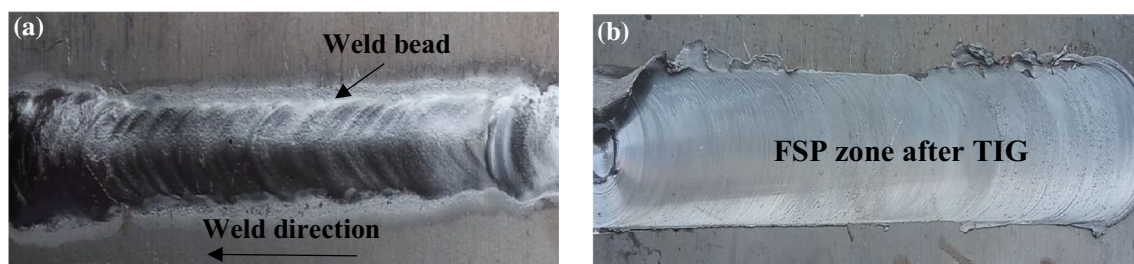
Weld bead formation and quality of weld, a TIG welding, b TIG + FSP
